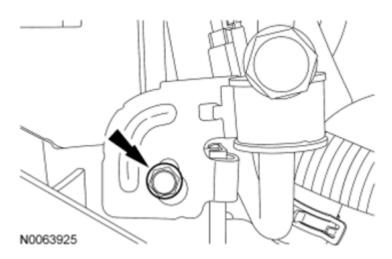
Locating A/C Pressure Tube Bracket Bolt Courtesy of FORD MOTOR CO.
